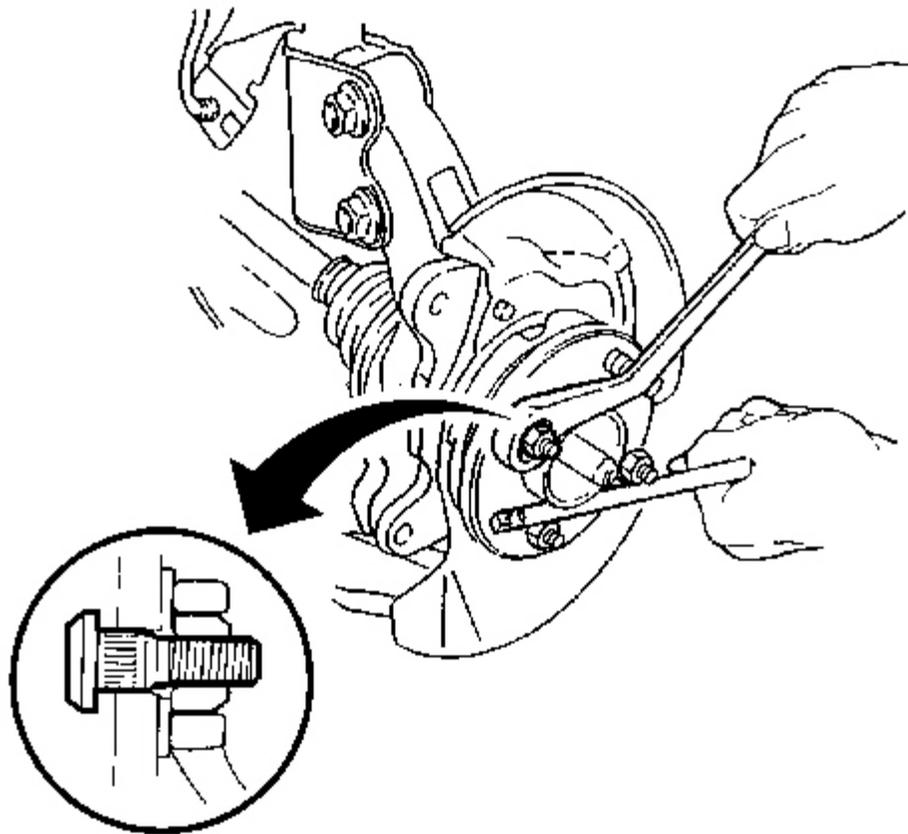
Seating Stud Head In Wheel Bearing/Hub Flange
